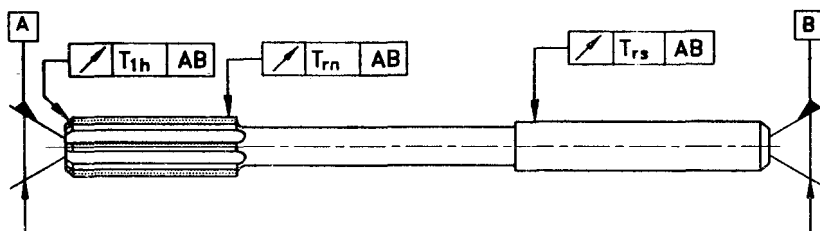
RUN OUT TOLERANCES FOR CARBIDE TIPPED REAMERS WITH PARALLEL SHANK
